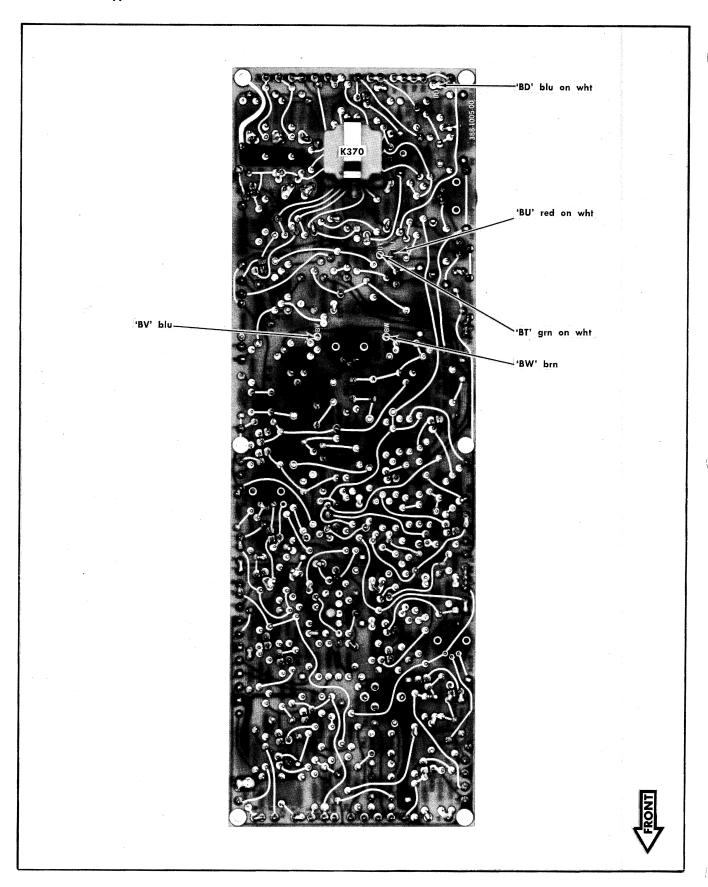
Bottom view of Main board showing components and wire color codes.
